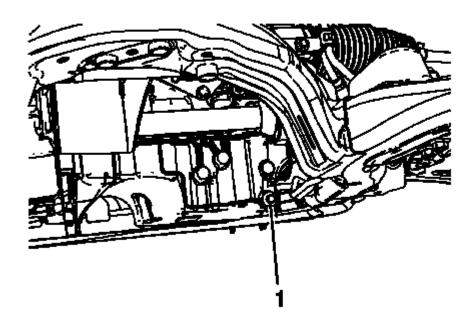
Locating Oil Drain Plug Courtesy of GENERAL MOTORS COMPANY
